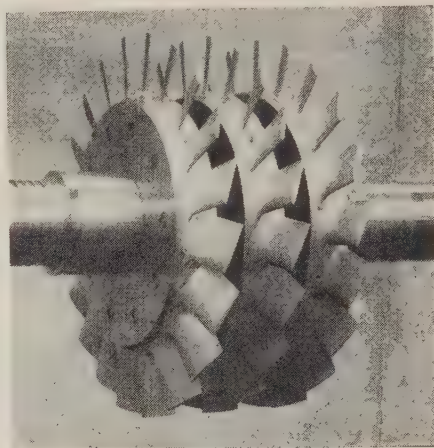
IMPELLER OF MODERN ESCHER WYSS AXIAL-FLOW COMPRESSOR
